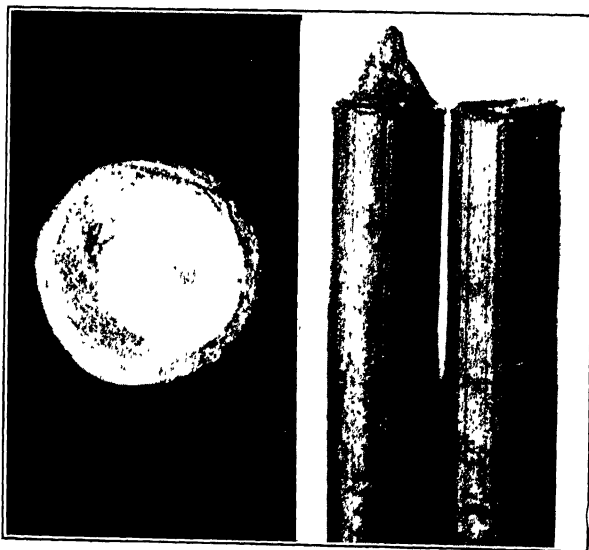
END VIEW OF FRACTURE CAUSED BY CUP AND CONE DEFECT.
